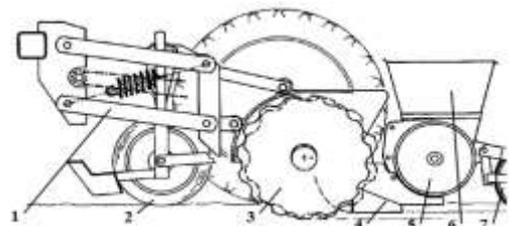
Experimental direct sowing machine: 1 – frame; 2 – support wheel; 3 – two disc coulters with notched blades; 4 – shoe coulters; 5 – sowing unit; 6 – seed hopper; 7 – press wheel
